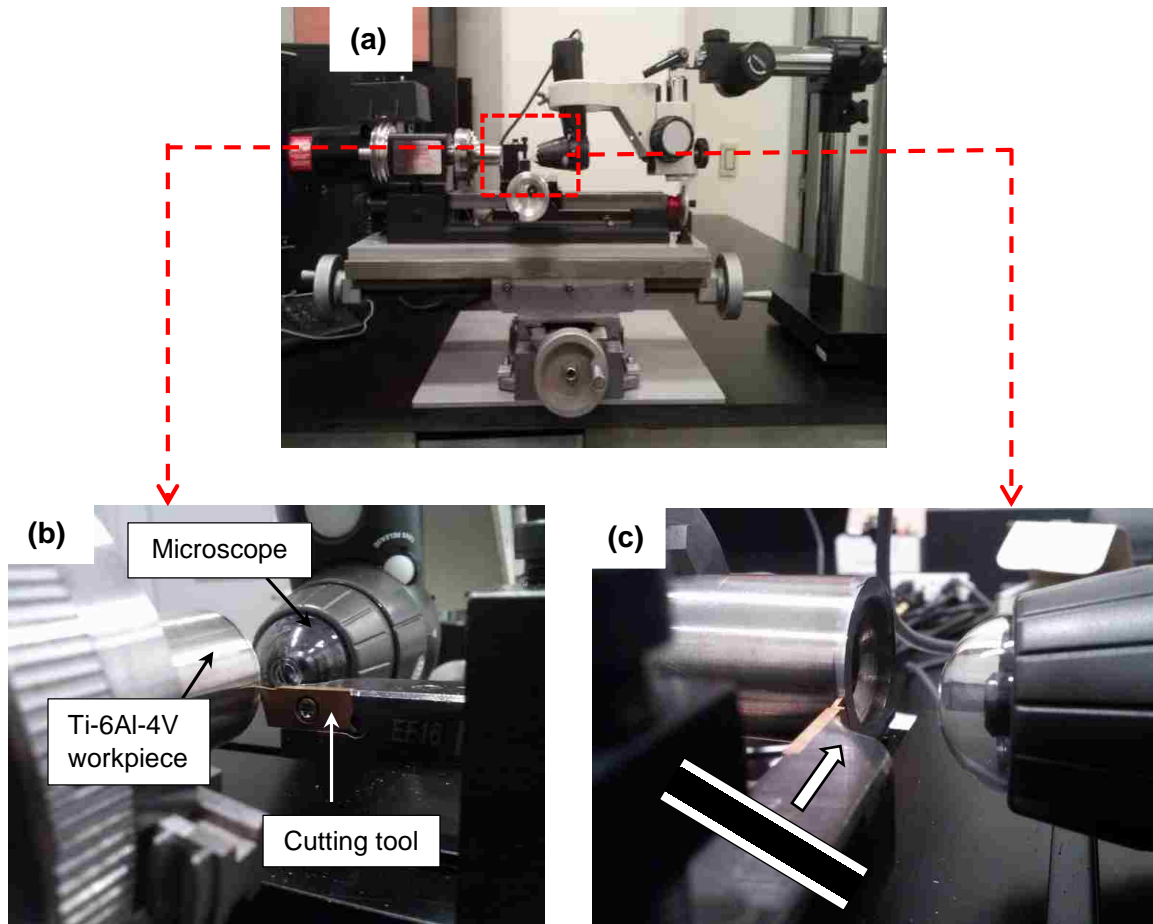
(a) Overview of the experimental setup for in-situ machining of Ti-6Al-4V, (b, c) Close up view of the setup showing the cutting tool, feed direction, and the microscope in the sample plane of view as the workpiece
